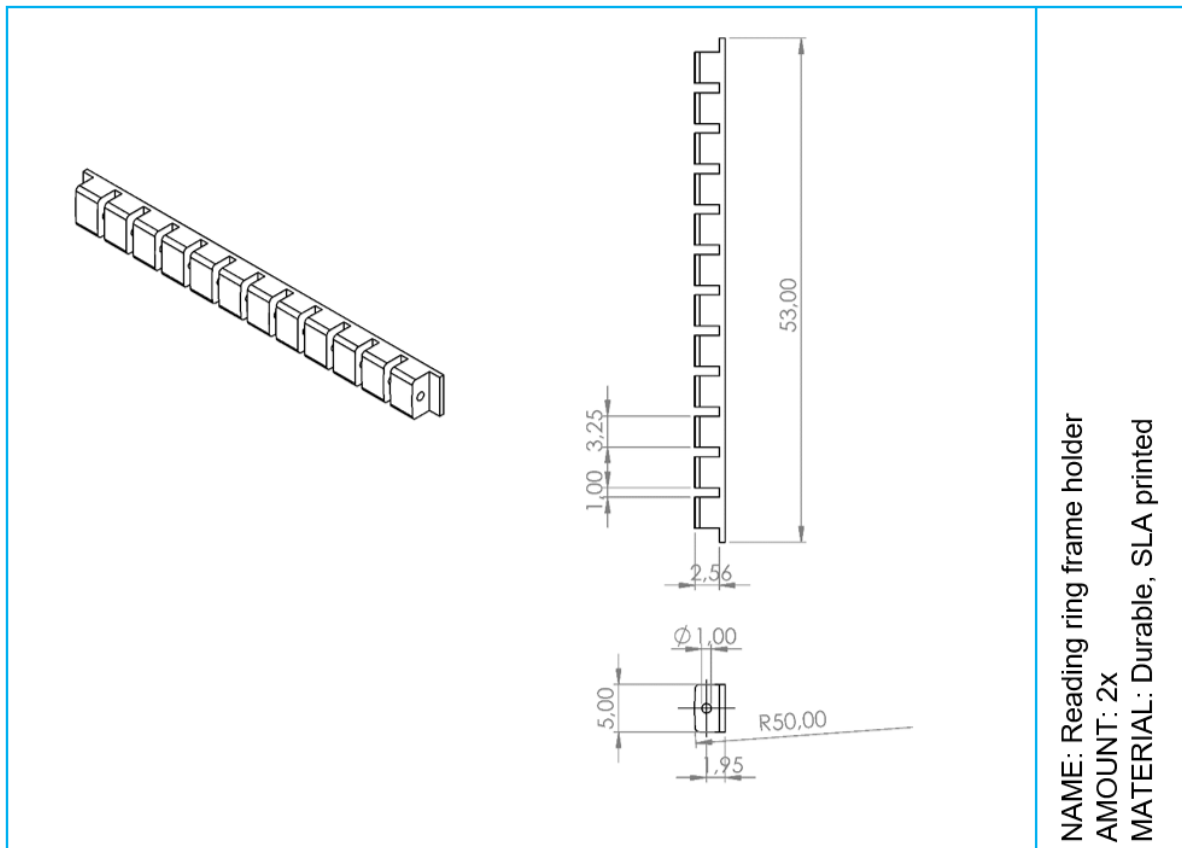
Construction drawings of the reading ring frame holder - 3D Printed prototype
